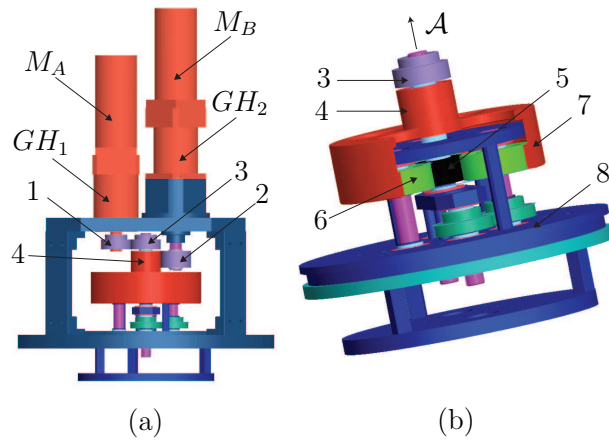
The drive unit: (a) a global view, (b) the planetary gear train
